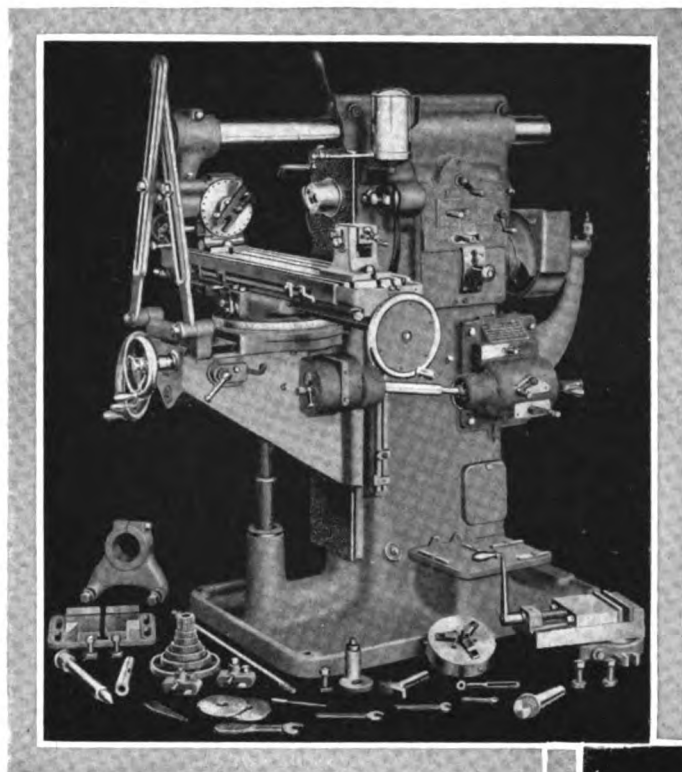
No. 1A Universal Milling Machine Constant Speed Drive
